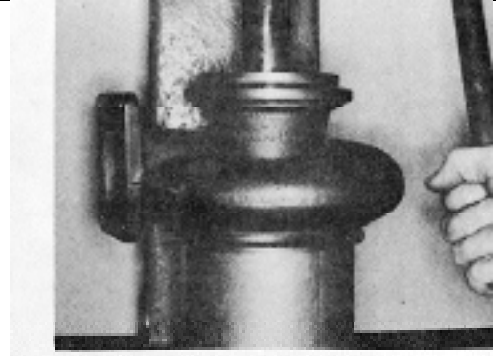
, T-519. Pressing rotor assembly and bearing housing from turbine casing
